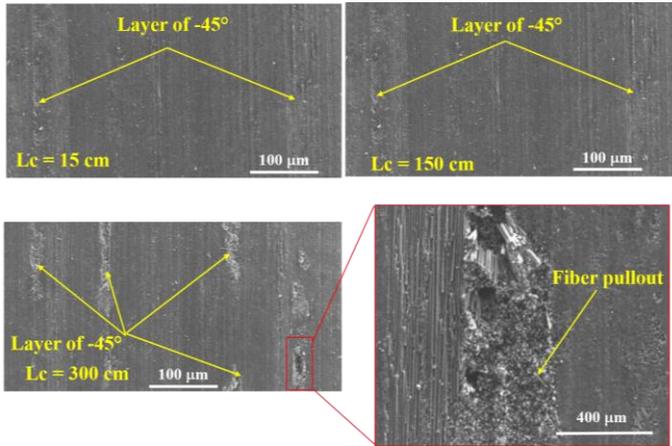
Machining damage observed with a feed speed of 500 mm/min and spindle speed of 8000 rpm
